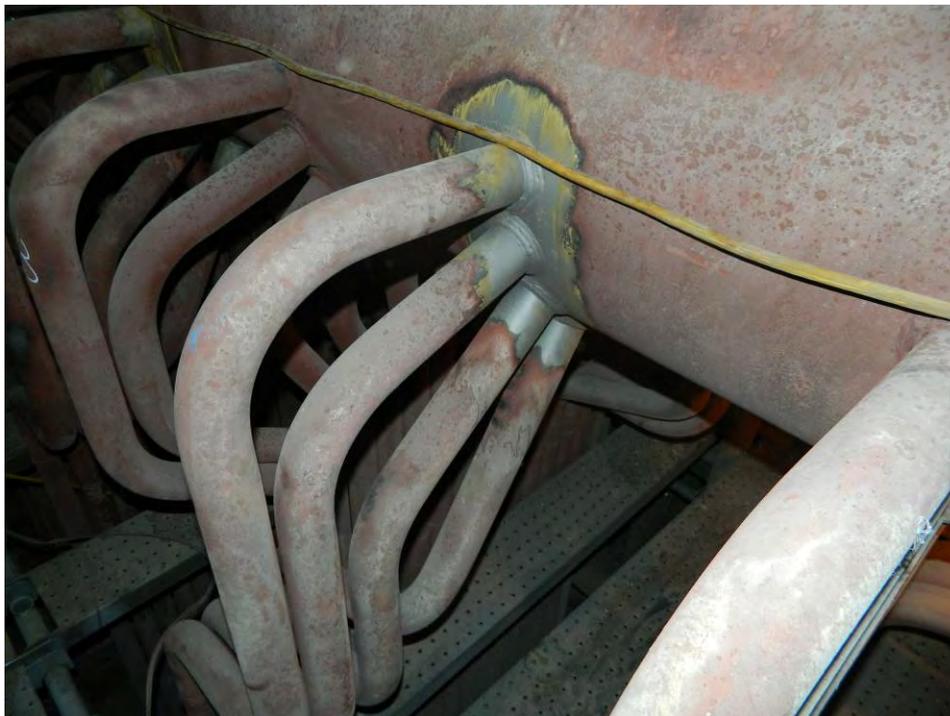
Photographs of the Platen Superheater Outlet header tubing.
